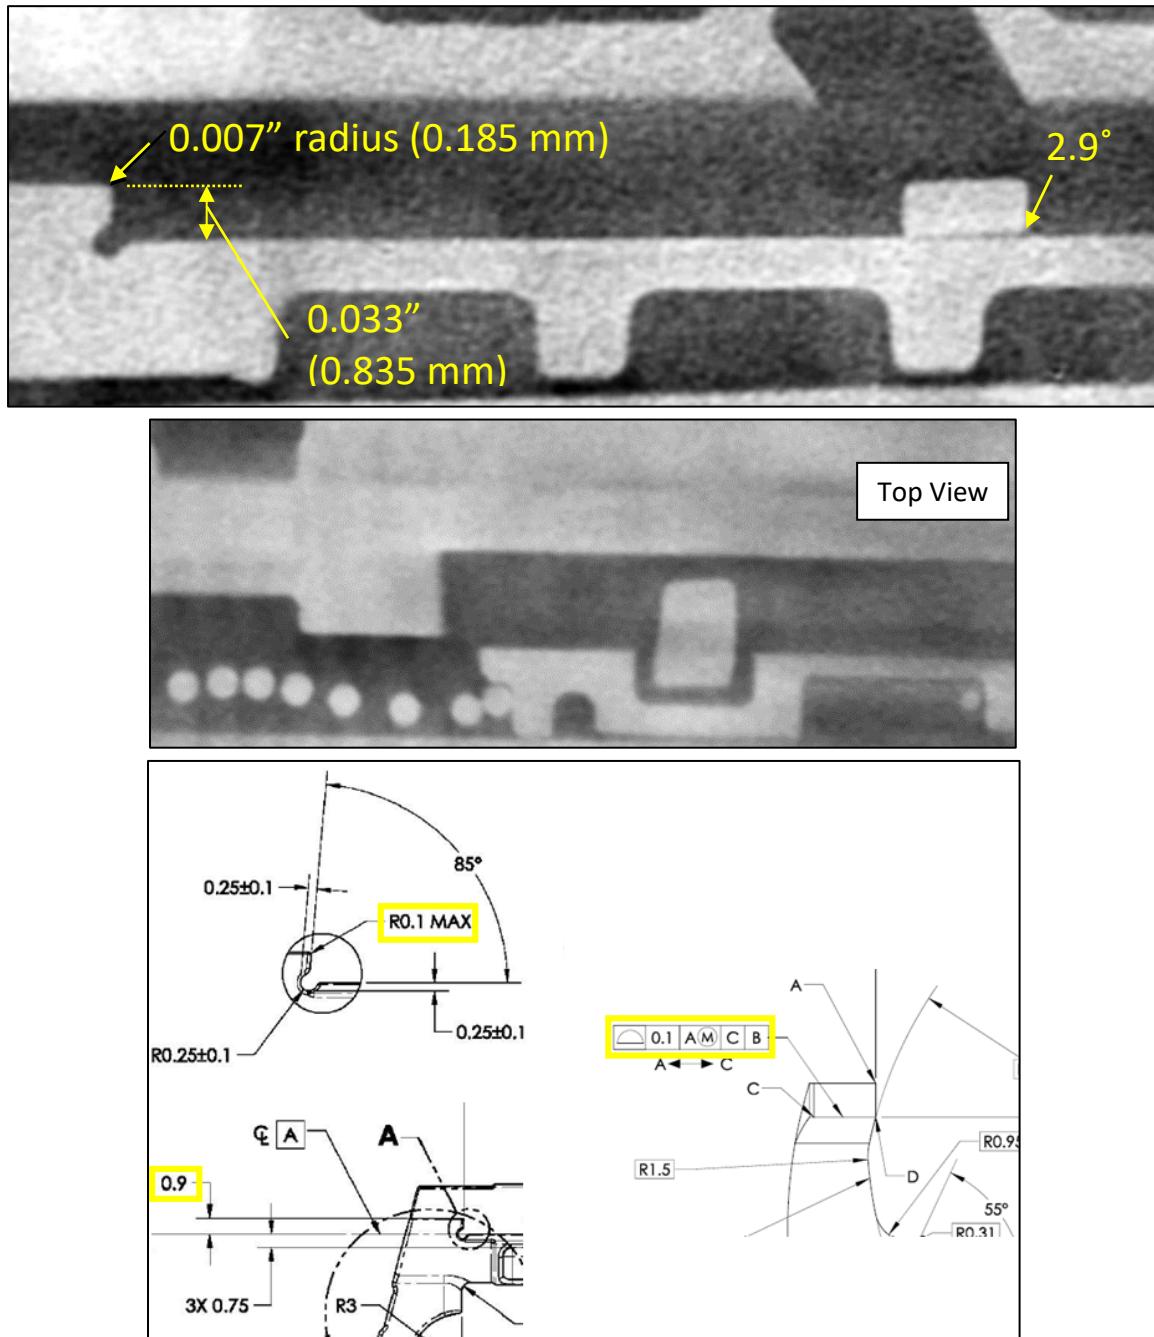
CT scan of striker stop and safety lock (top), top views of same parts (center), Sig Sauer drawings of the same parts (below)
